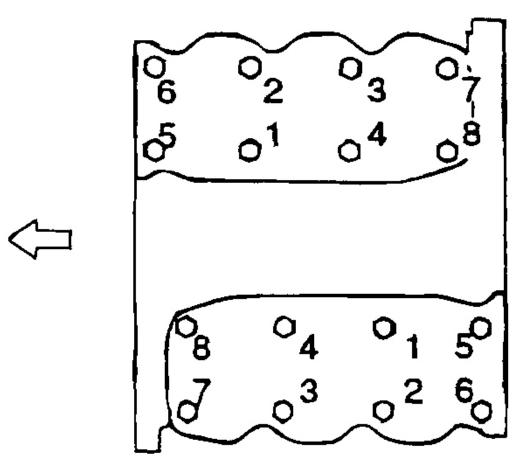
Illustrating Cylinder Head Gasket Courtesy of KIA MOTORS AMERICA, INC.
